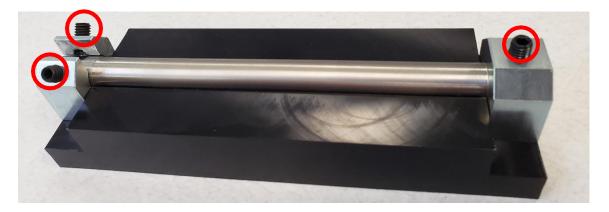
INSTALL AND TIGHTEN THE SET SCREWS
